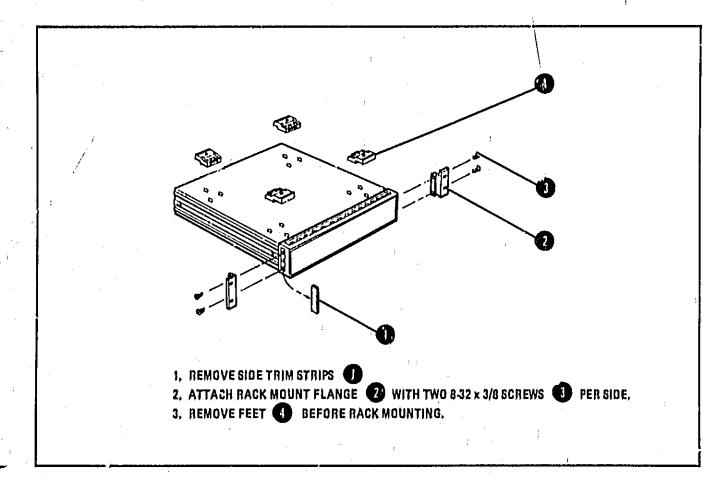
, Installation of Rack-Mounting Hardware without Front Handles
